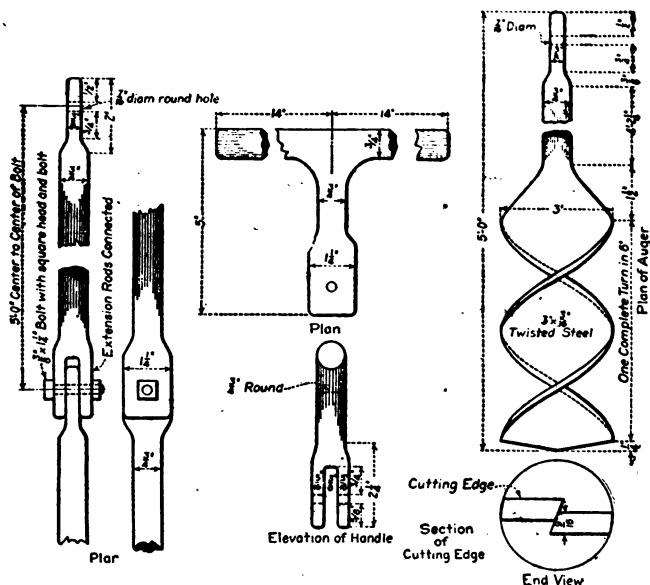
Hand Operated Rod Auger Used on Wipipeg Shoal Lake Aqueduct.
